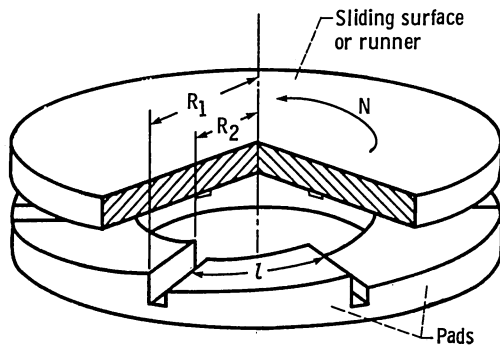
Configuration of fixed-incline-pad thrust bearing. (From Raimondi and Boyd, 1955.)
